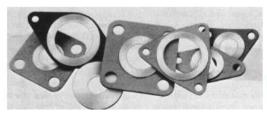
Die-cut gaskets used for flanged joints. (Courtesy of Crane Packing Co., Morton Grove, Illinots.)
